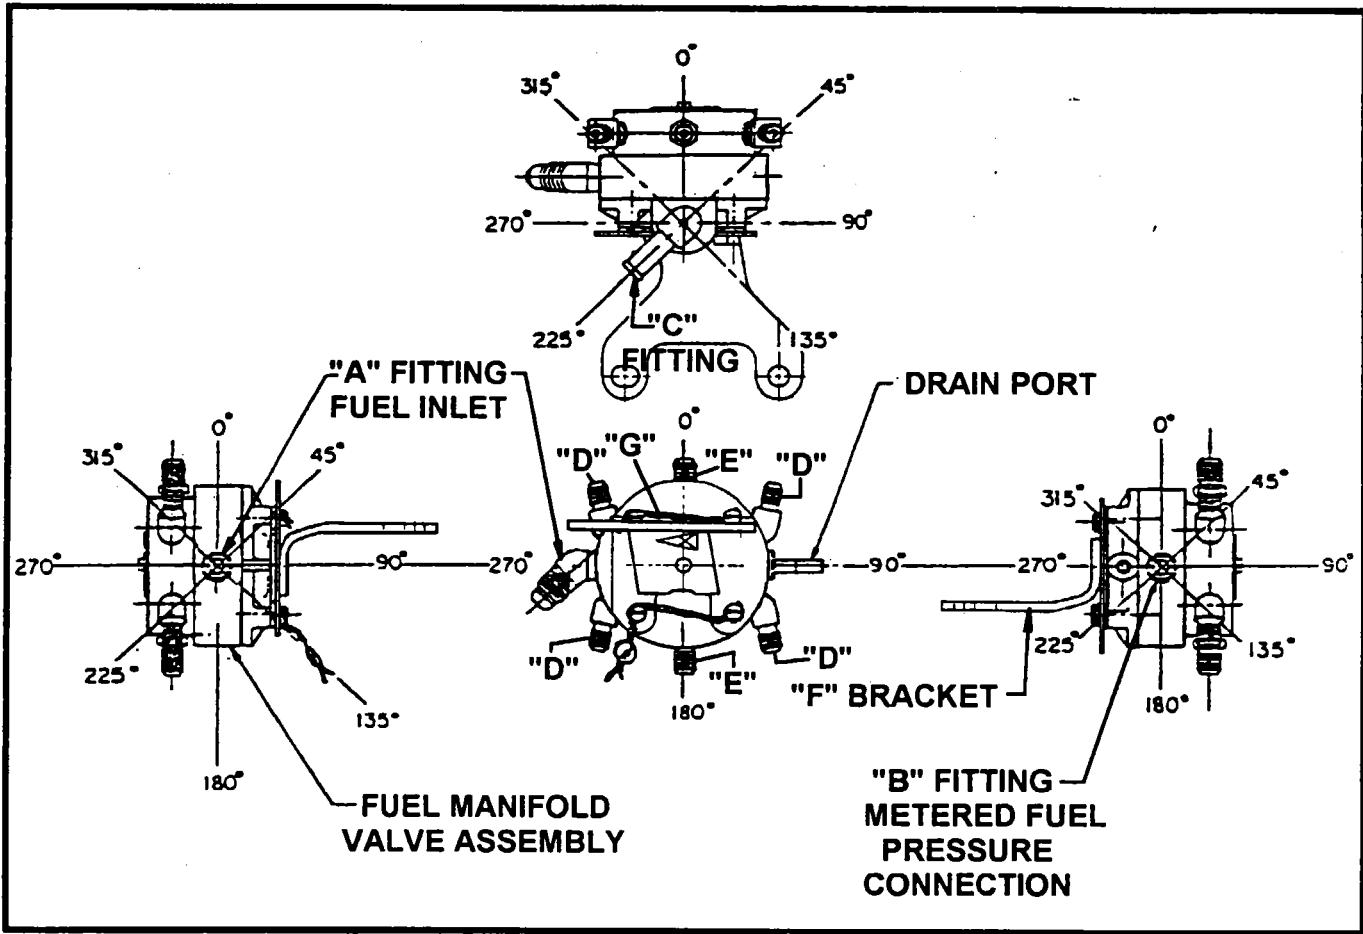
FUEL MANIFOLD VALVE FITTING LOCATIONS
